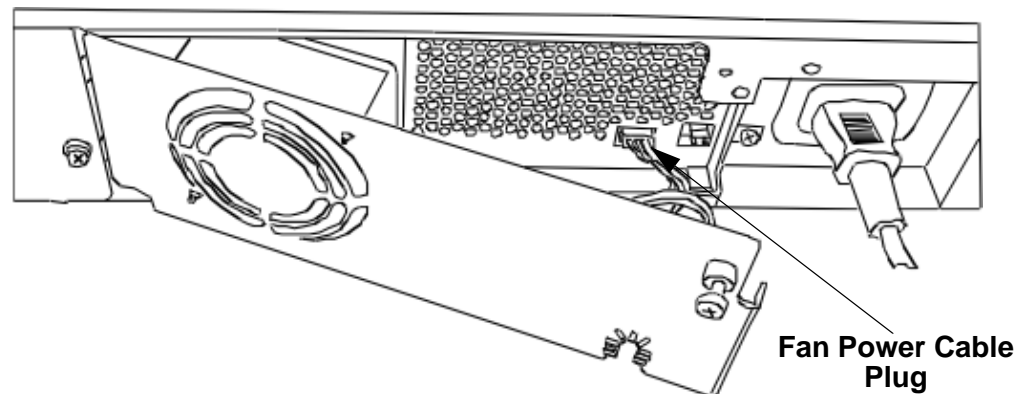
Opening Chassis Access Panel (CHS2U-AU Chassis)
